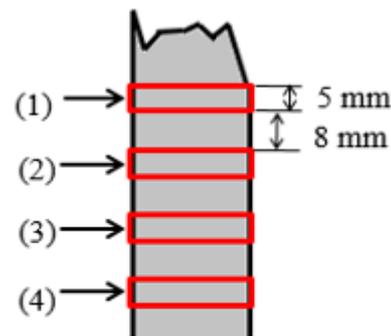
Schema showing how specimens were cut out from the fracture surface
